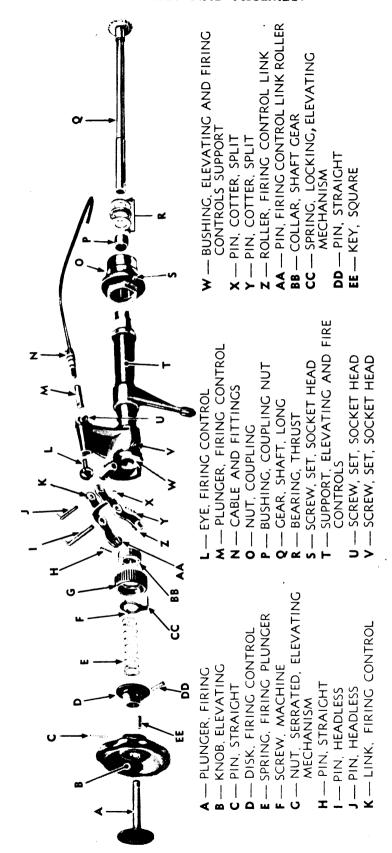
Firing and Elevating Mechanism Controls on Carriage M4 — Exploded View
